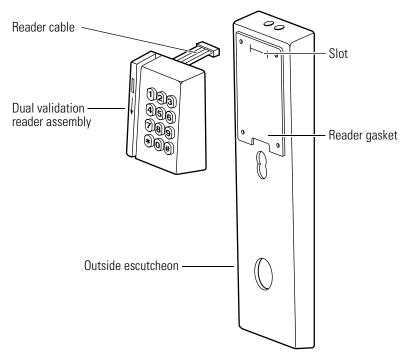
Positioning the B.A.S.I.S. dual validation reader assembly
